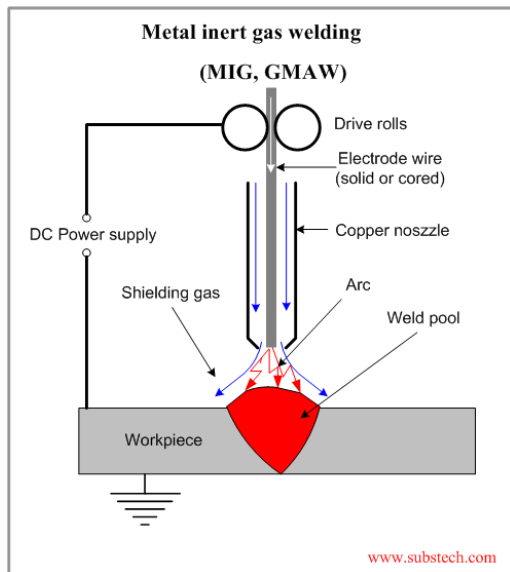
Gas Metal Arc Welding (GMAW) (www.substech.com)
